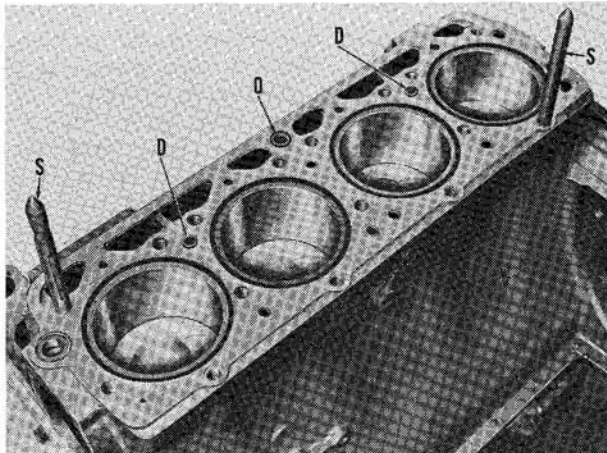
Prior to fitting cylinder head gasket to cylinder block, be sure to install new sealing ring (O) in recess in top face of block at rocker arm shaft oil feed hole. Align gasket on dowels (D) and use guide studs (S) so that cylinder head will set down squarely over the dowels. Note: Dowels not used on model "FMD" and early "FPM".
